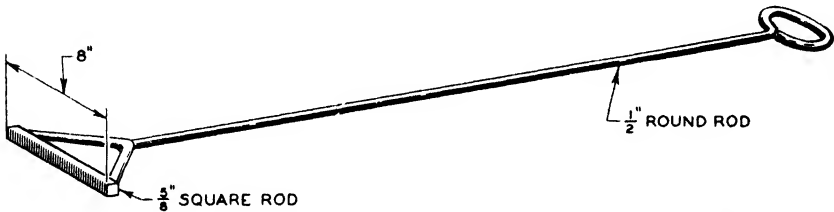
A Hand Pushing Tool for Shoving Tools through the Furnace
